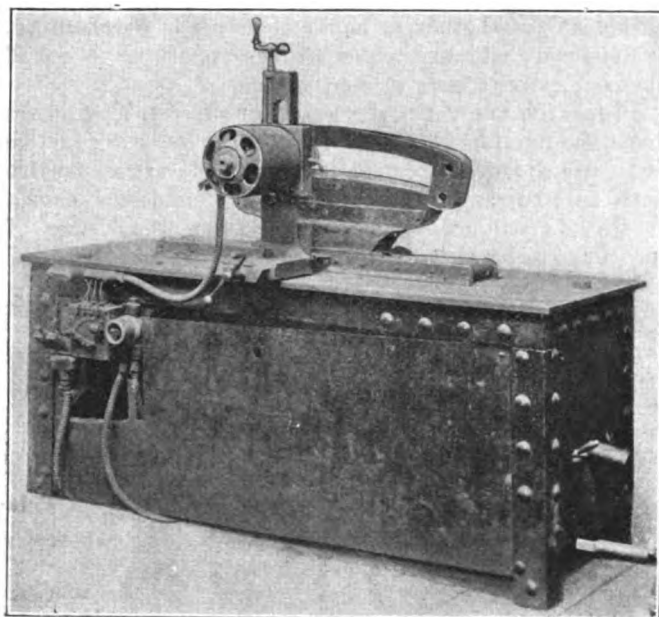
HOME-MADE LINK GRINDING MACHINE
